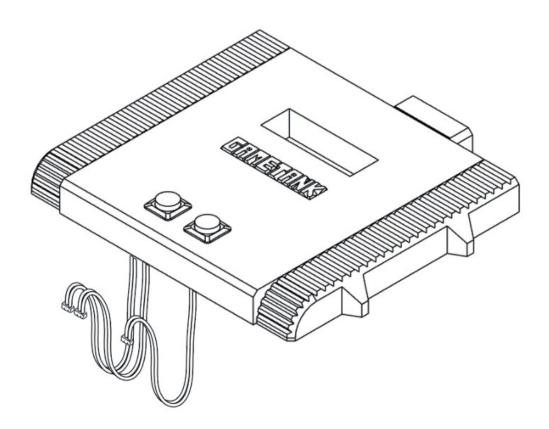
Thread button wires through button holes, fasten buttons with threaded collars
